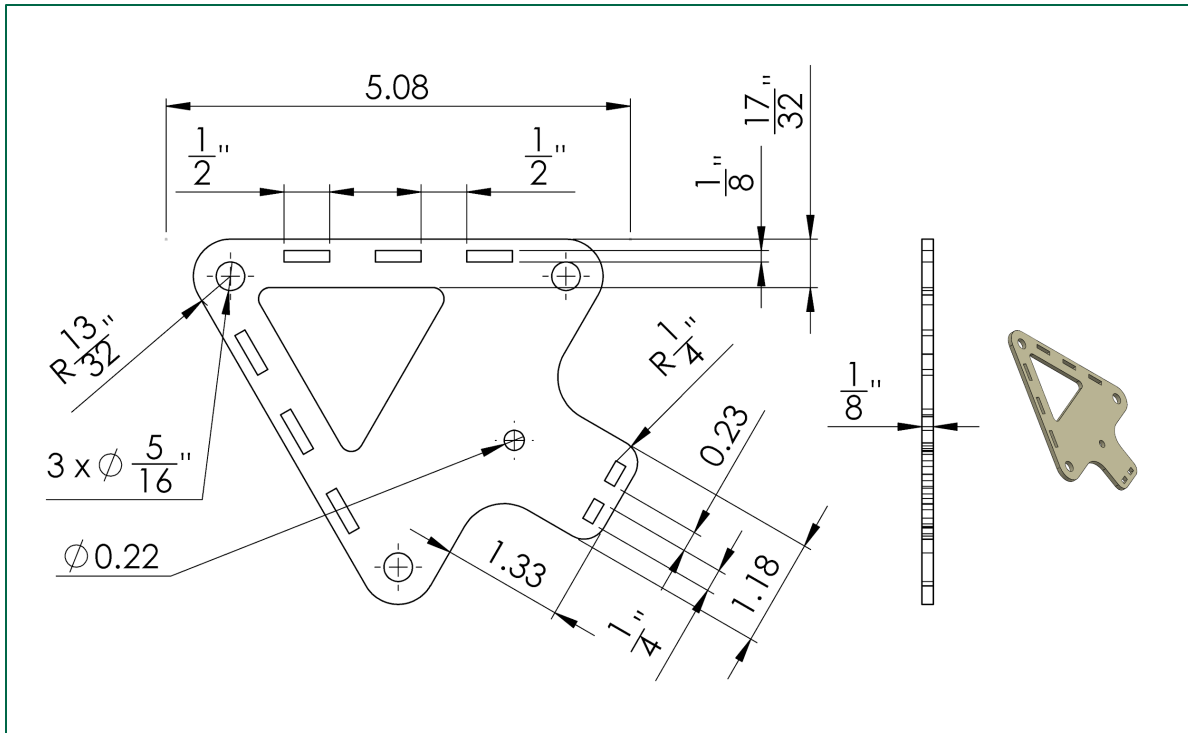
Avionics bay sled assembly upper cap, with access opening and antenna mount.
